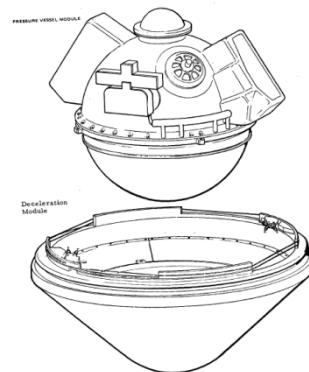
, 1-1 Small Probe Spacecraft (Exploded View)
